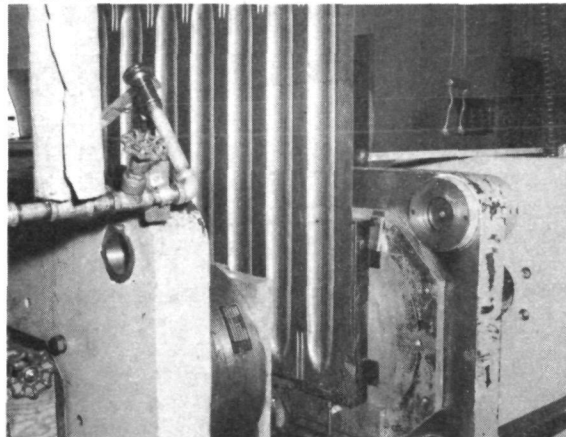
PANEL IN POSITION FOR FINAL SIZING
